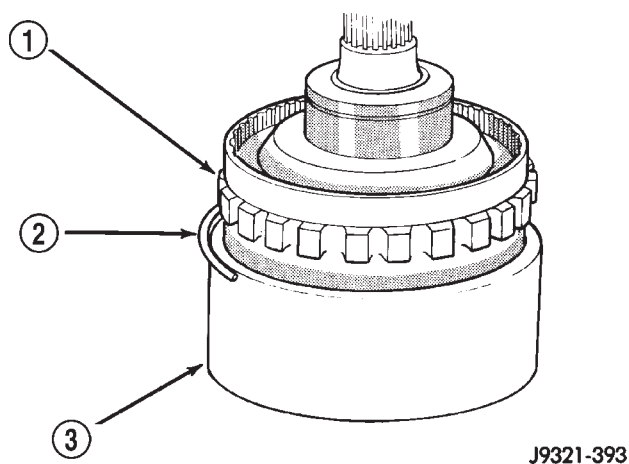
Clutch Drum And Outer Retaining Ring Installation
